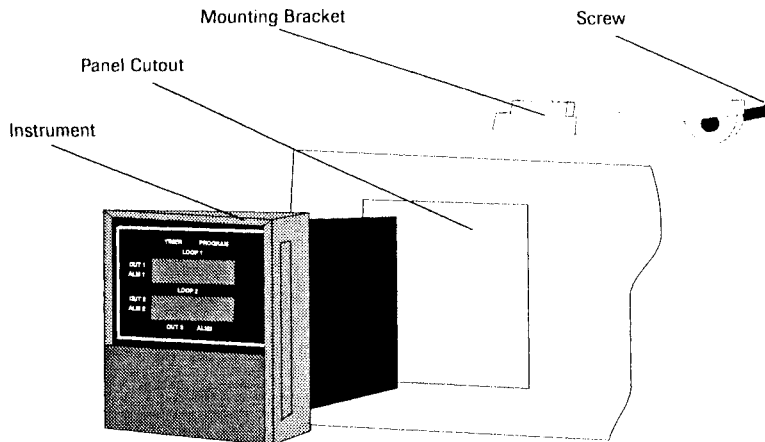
shows the mounting dimensions for the controller. Cut out the square “panel cutout” mounting hole and install the unit as shown in Figure 2.3. Loosen the screw at the rear of the mounting bracket and slide the bracket off of the controller. Place the controller through the square panel cutout and replace the mounting bracket. Tighten the screws to secure the controller firmly against the mounting surface.
